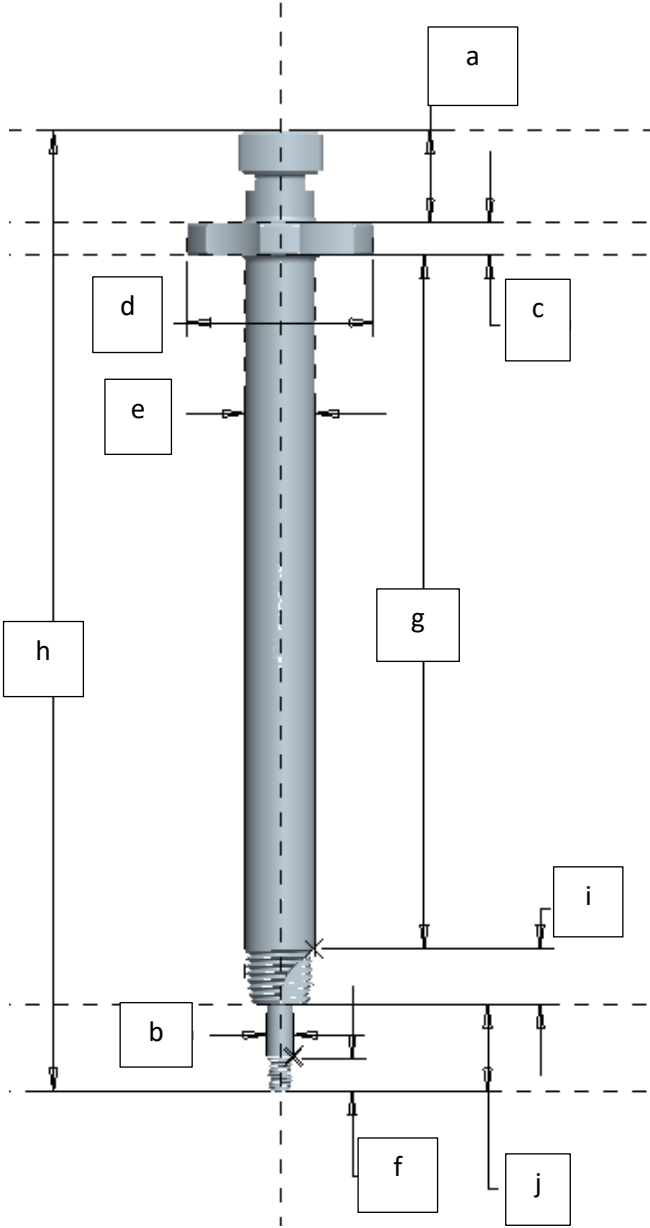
Front view of poly sleeve/filler bushing removal tool
